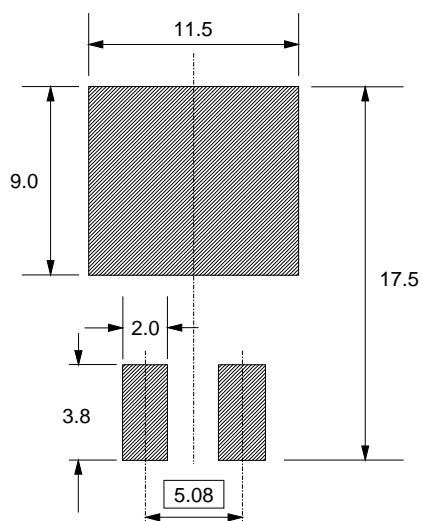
SOT404 : minimum pad sizes for surface mounting.
